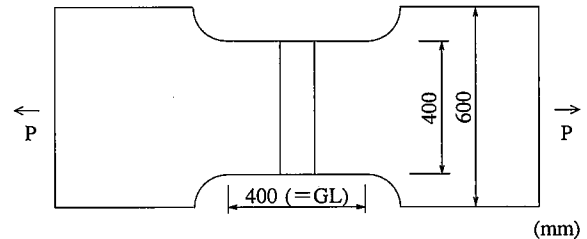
Specimen used for determining fracture strength of weld joint
